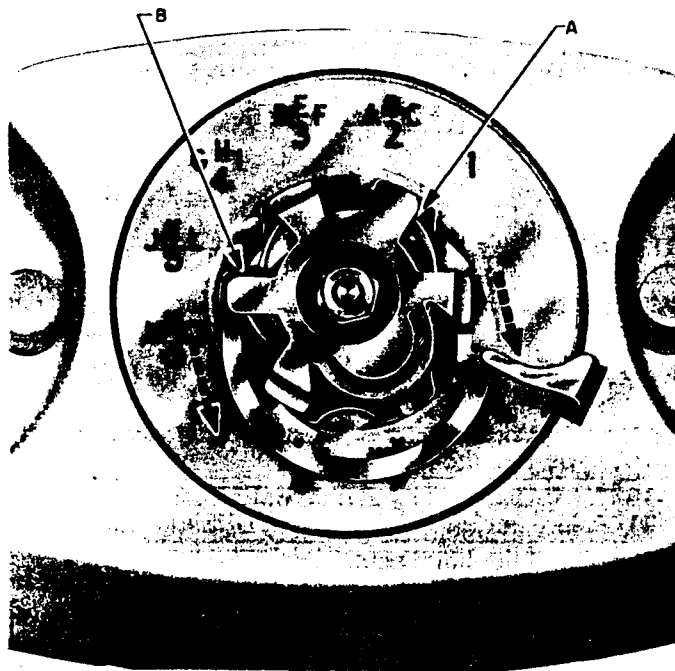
Lock Ring in Extreme Forward Position for Removal
